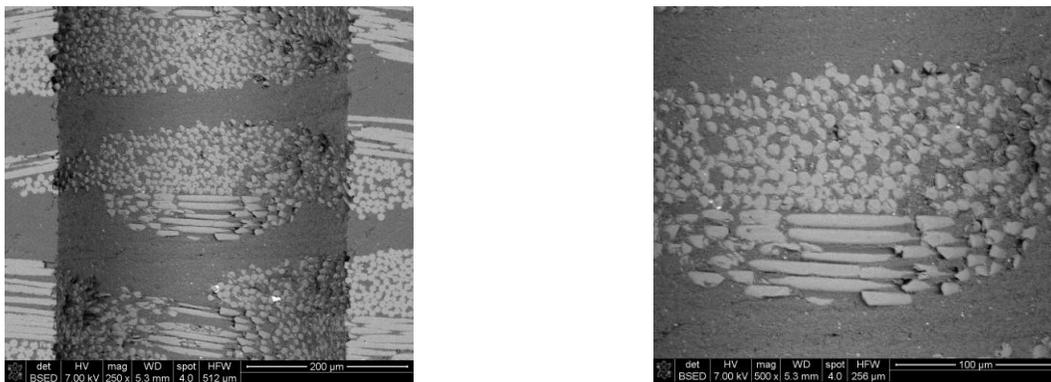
Drill-hole surface roughness for a laminate board made from a non-toughened resin showing a smoother drill-hole surface.
